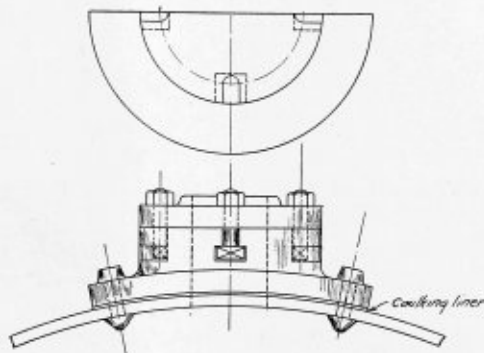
CAST STEEL SADDLE FITTED WITH TEE BOLTS.
